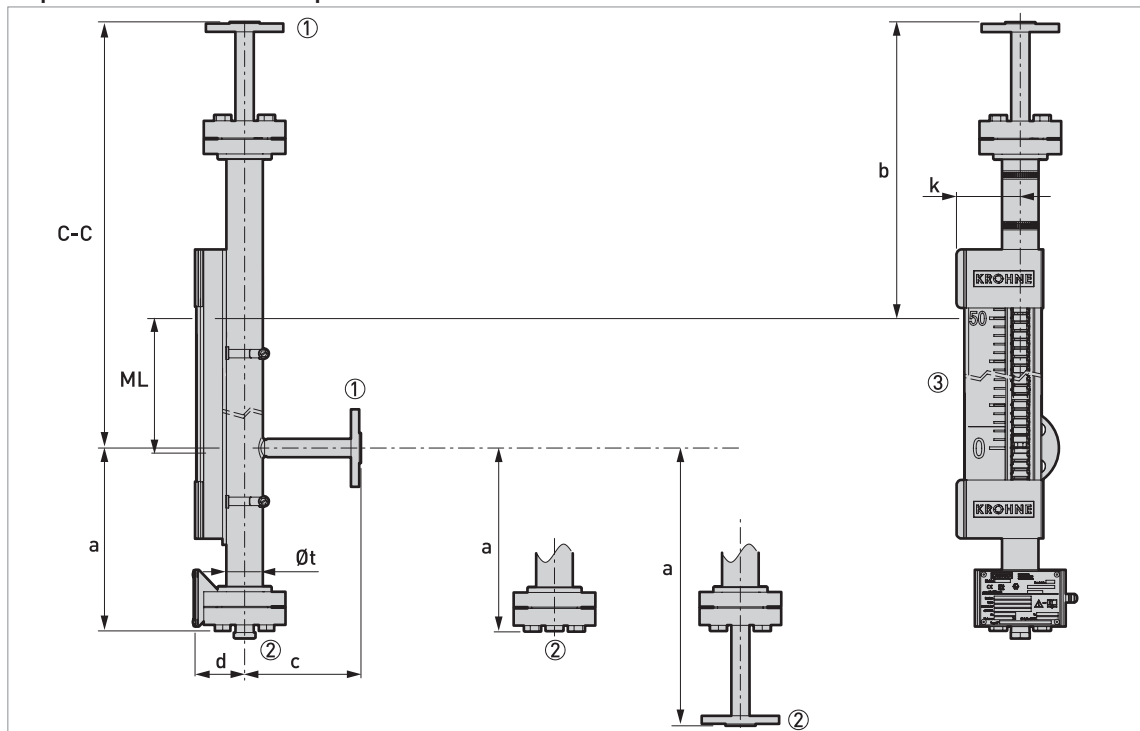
BM26A-1000: top axial - bottom side process connections
